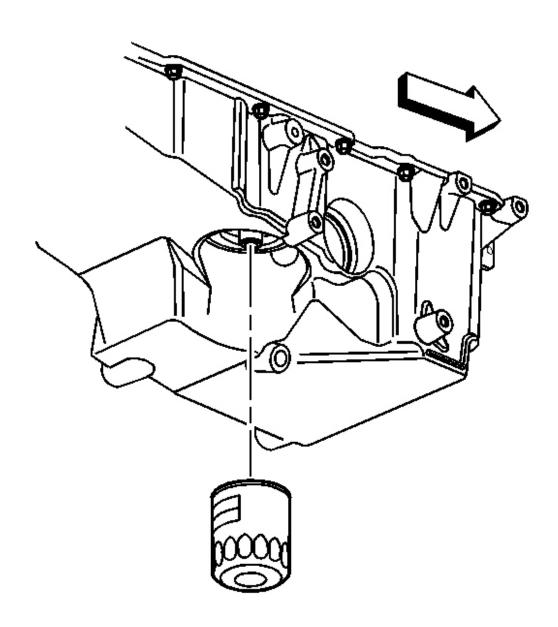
Locating Oil Filter Courtesy of GENERAL MOTORS CORP.
